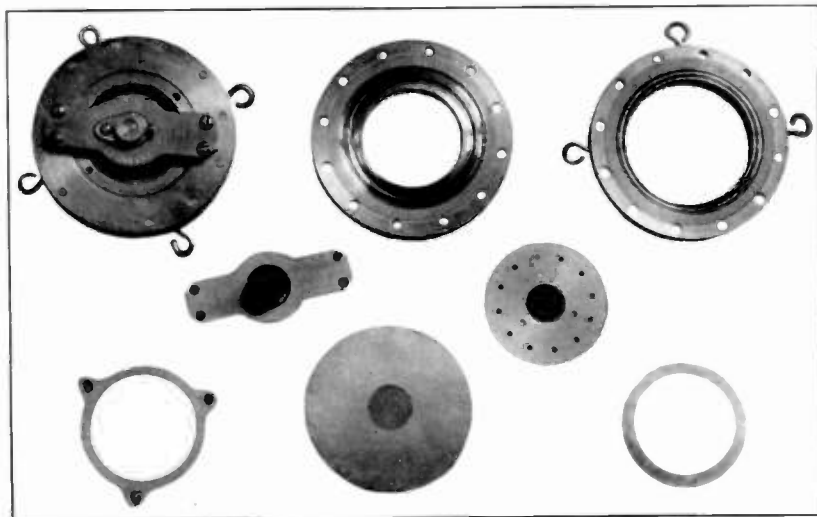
Double Button Carbon Microphone Assembled and Disassembled
